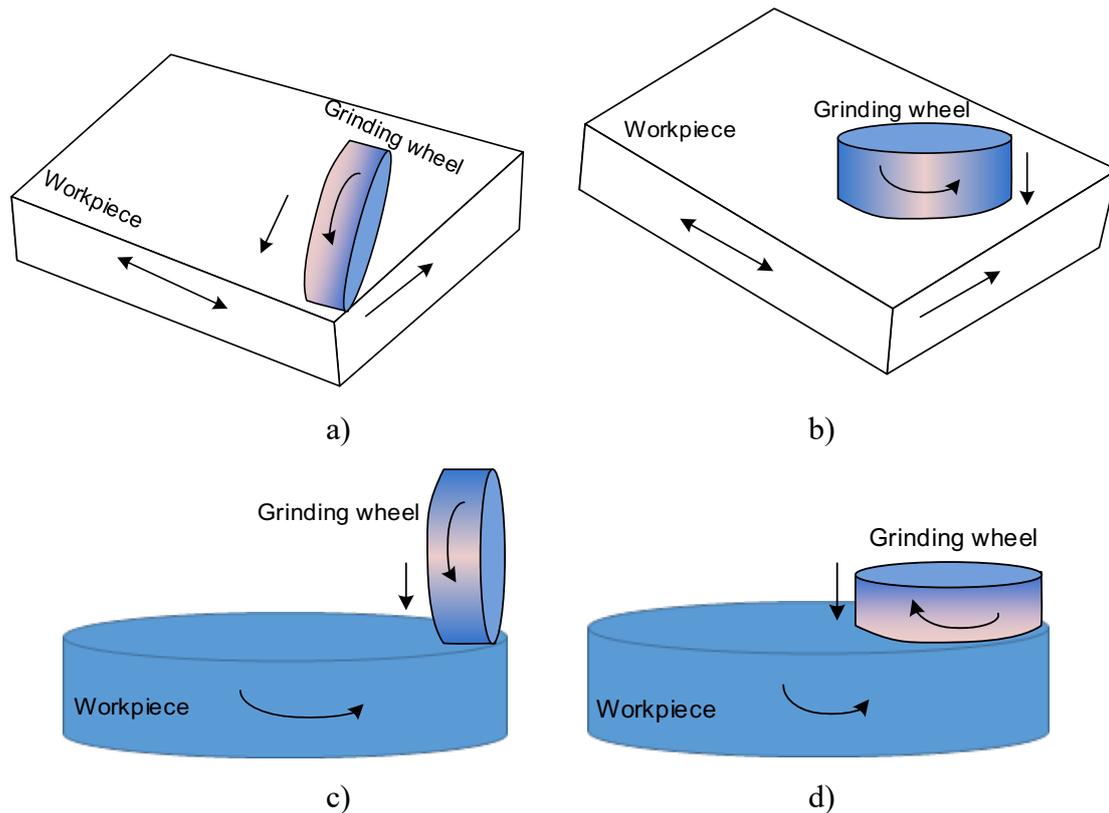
Schematic diagram showing various relative movements given to the grinding wheel and workpiece for surface grinding a) reciprocating movement to the long workpiece for peripheral grinding, b) reciprocating movement to the long workpiece for face grinding, c) rotary movement given for small size workpiece during peripheral grinding and d) rotary movement given for small size workpiece during face grinding.
